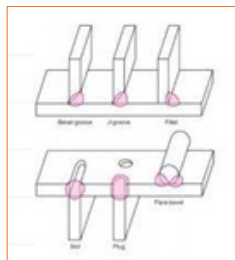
Edge Preparation Drawing used for Welding Joints
